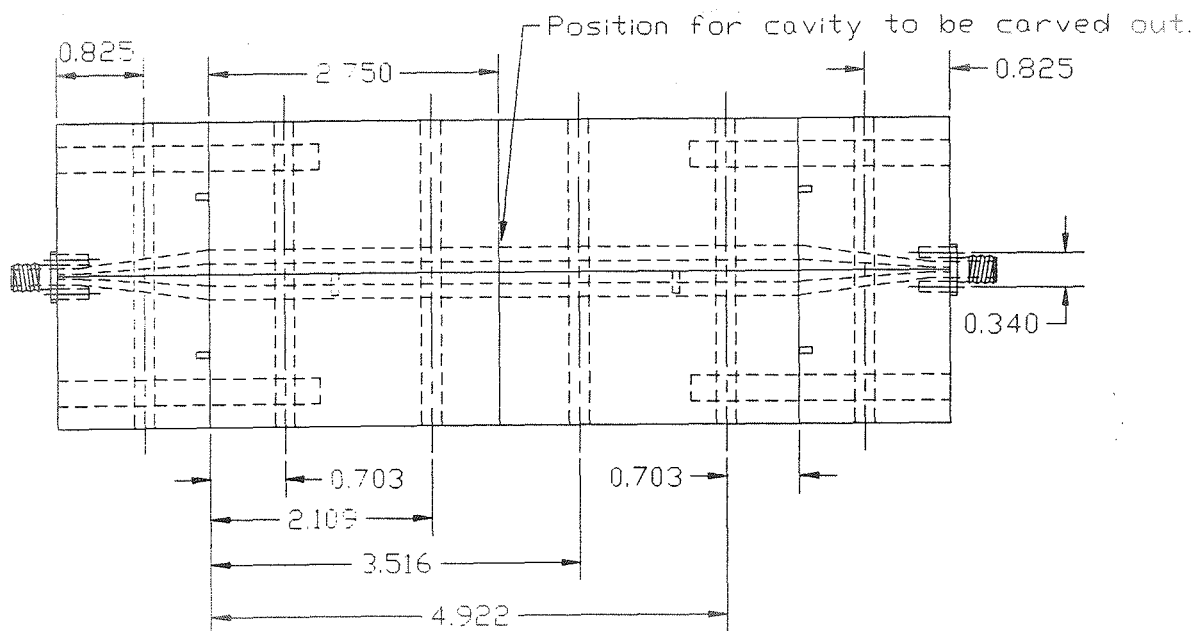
CAD drawing for the 50- Ω reference line used in the stretched wire measurement. All dimensions are in inches.
